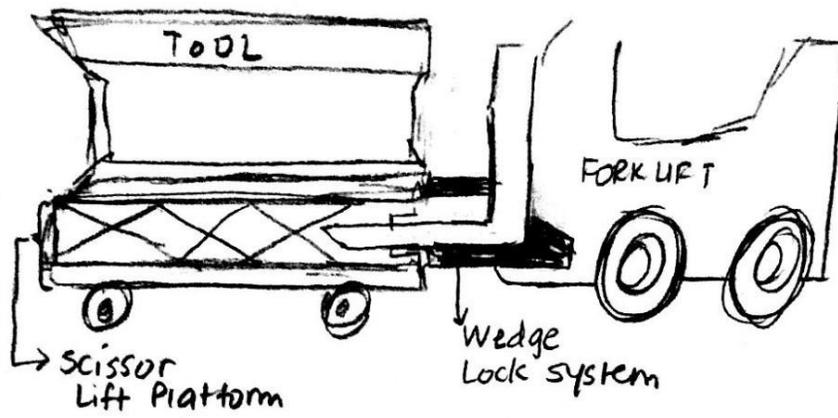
Scissor Jack Lifting Mechanism and Wedge Locking System
